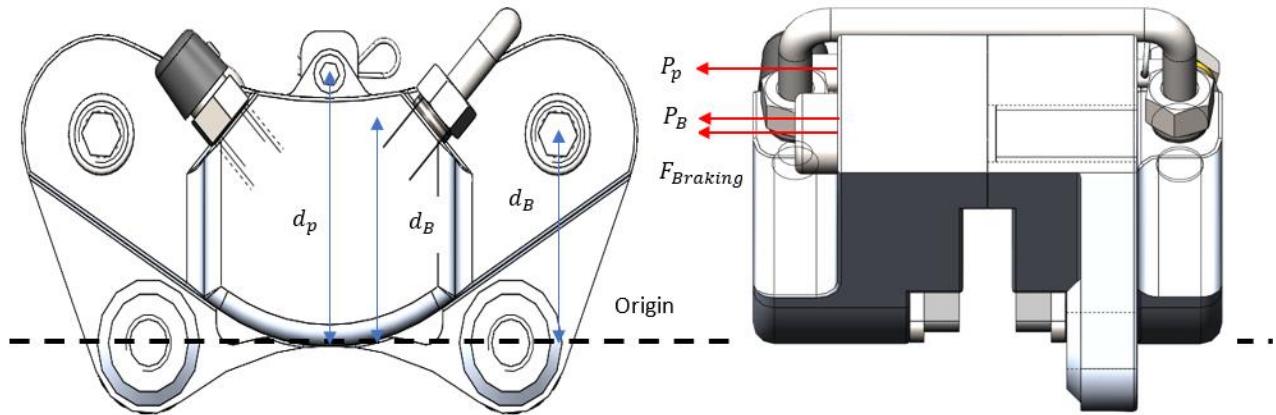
Load diagram on calliper for loading of calliper mounting bolts.
